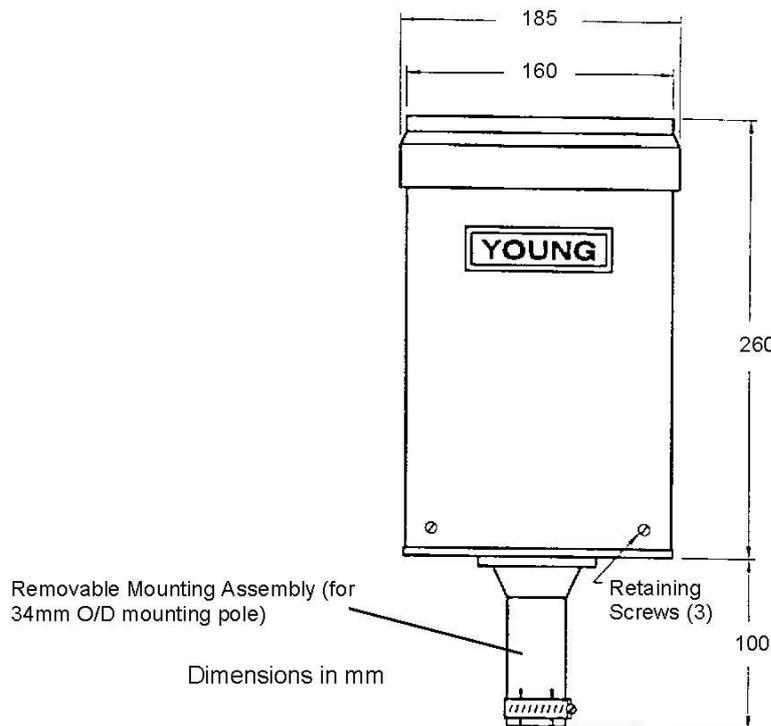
Dimensions of 52202/52203 Tipping Bucket Rain gauge
